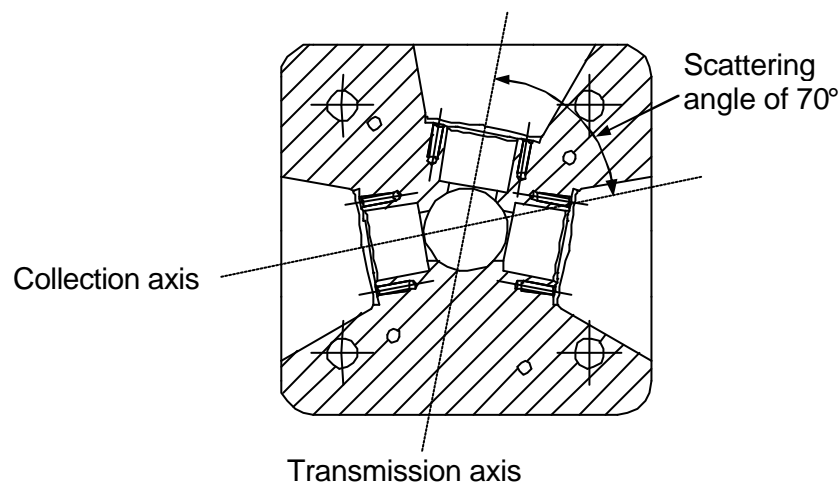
Cross-section view of the PDA Proteus cylinder head
